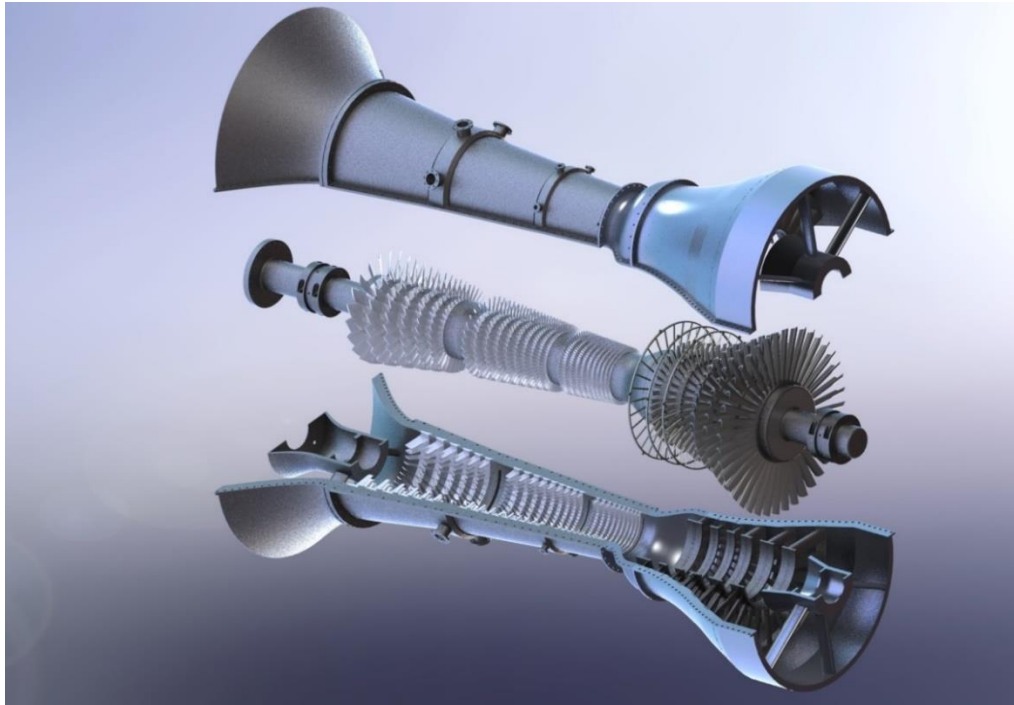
Exploded view of Ultra High Efficiency Gas Turbine (UHEGT)
